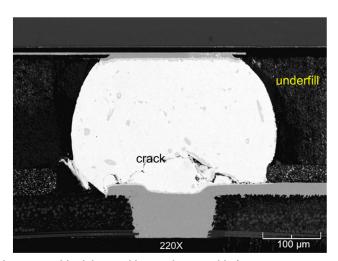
Solder joint cracking on the PCB side for UF3.
